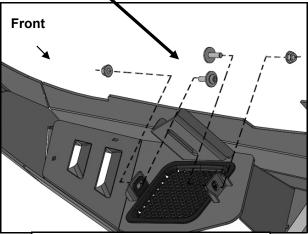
Inner and Center Mesh Plates attached to the back of the bumper
